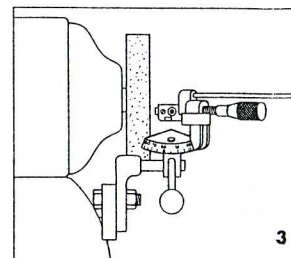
Drill grinding attachment mounted on the hand rest bracket.
